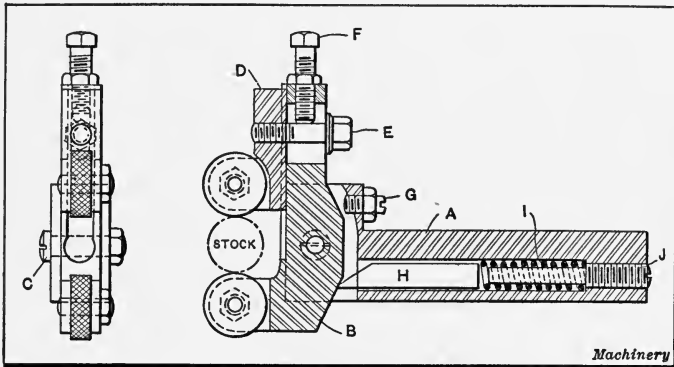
Double Knurl-holder of the Adjustable Type for Use on Top- or Side-working Tool-slides
